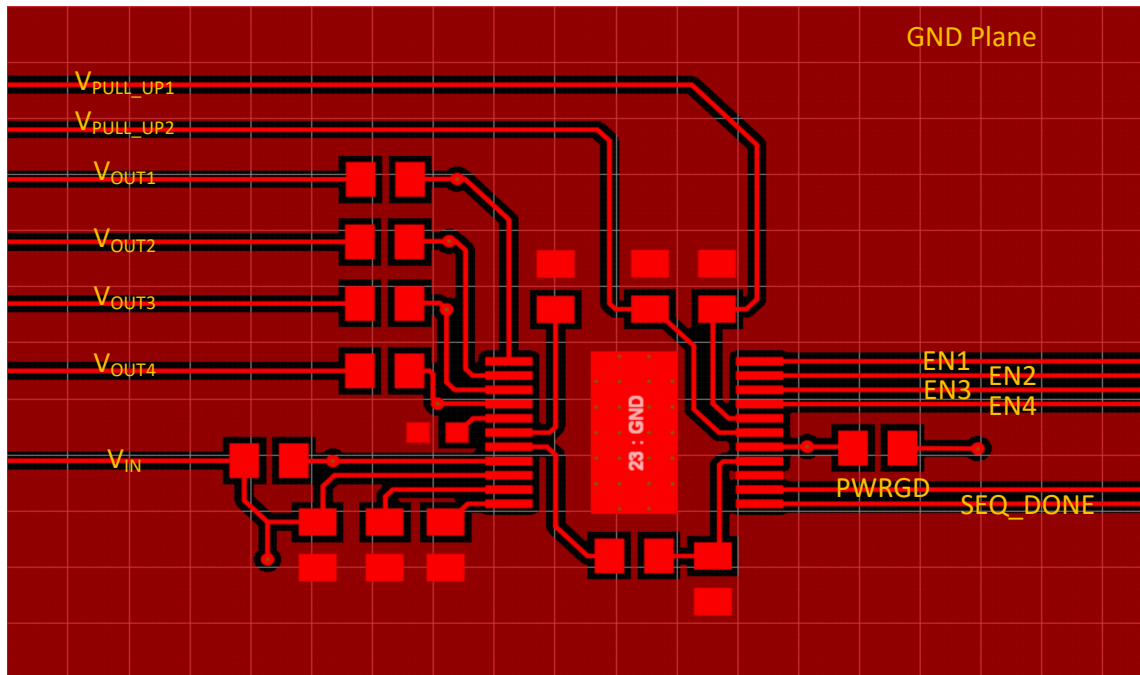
Printed Circuit Board Layout Example: Top Layer
